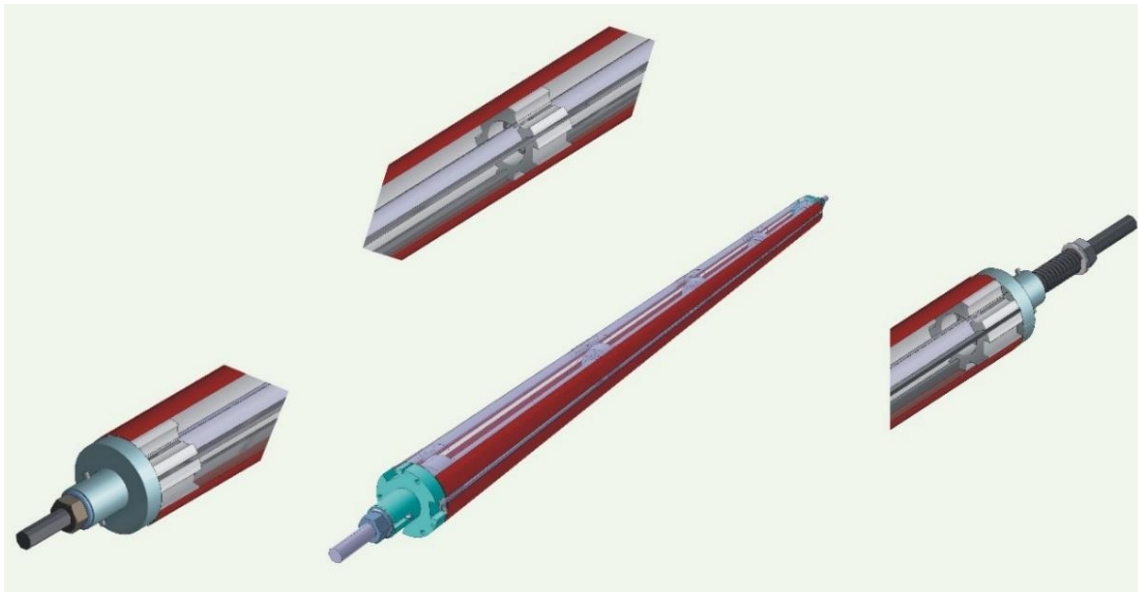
View of Inner Heating Apparatus – CATIA model
